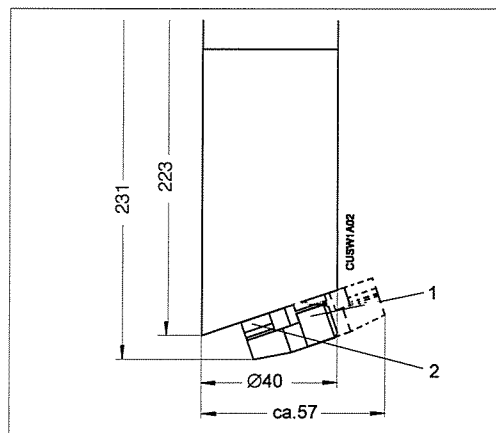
Dimensioned drawing of CUS 1-W / CUS 4-W
